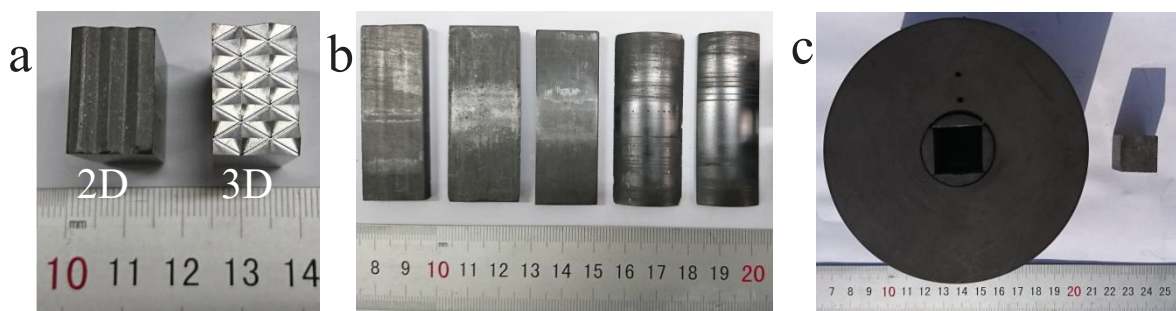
Photographs of the mould components: (a) 2D and 3D punches, (b) graphite parts assembled to form a rectangle cavity, and (c) graphite die and punch used for fabricating a sample having the rectangle shape.
